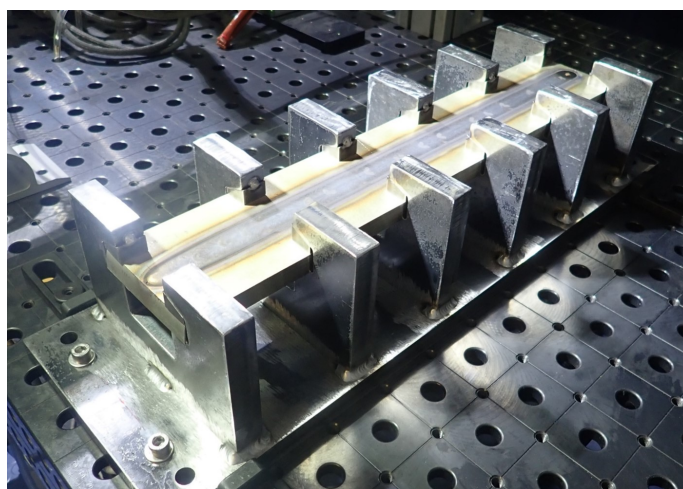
Images of the GTAW of a 316L(N) steel plate after welding.
